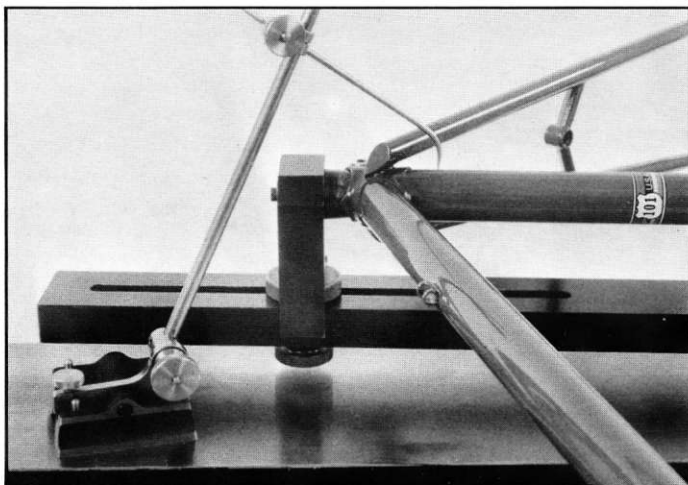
Seat tube is now locked into place using the plug assembly attached to stabilizing bar.
